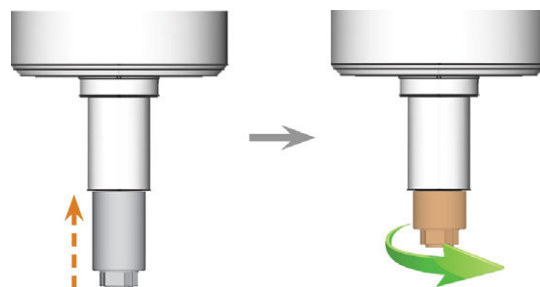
SCREWING IN THE COLLET CHUCK (MARKED ORANGE IN THE RIGHT ILLUSTRATION) INTO THE SPINDLE WITH YOUR HAND
